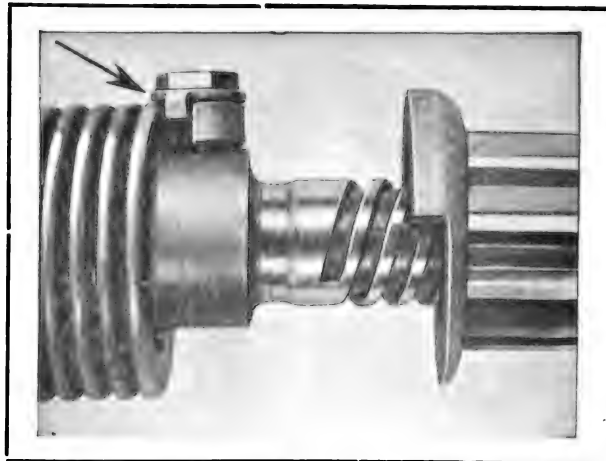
Arrows Indicates Lock Washer Which Prevents Loosening of Screw Holding Bendix Spring to Sleeve.
